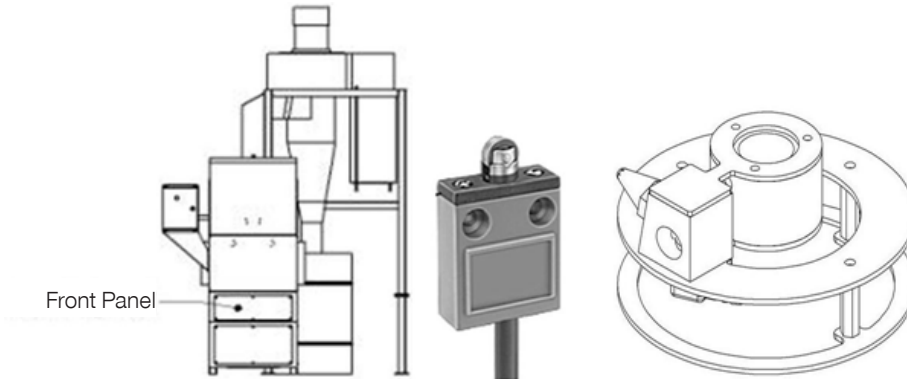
Front Panel, Limit Switch and Nozzle Assembly
